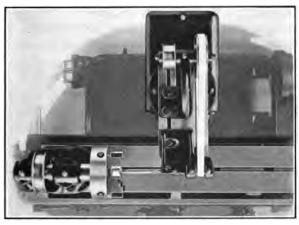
Internal grinding attachment in use in No. 1 universal grinding machine (B. & S.). The wheel stand is removed, the wheel stand platen is reversed (swivelled 180°) and the counter shaft bracket and grinding fixture bolted to the platen as shown. The countershaft and fixture spindle are connected by a small open belt and the belt from the overhead works to the countershaft is crossed to give the correct direction of rotation for the grinding wheel.
